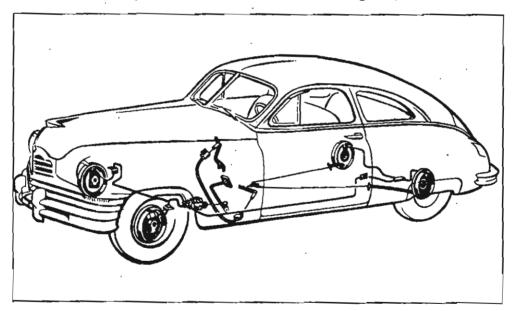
The Packard Braking System Makes Use of Self-Energizing Foot Brakes and Mechanical Hand Brakes.
